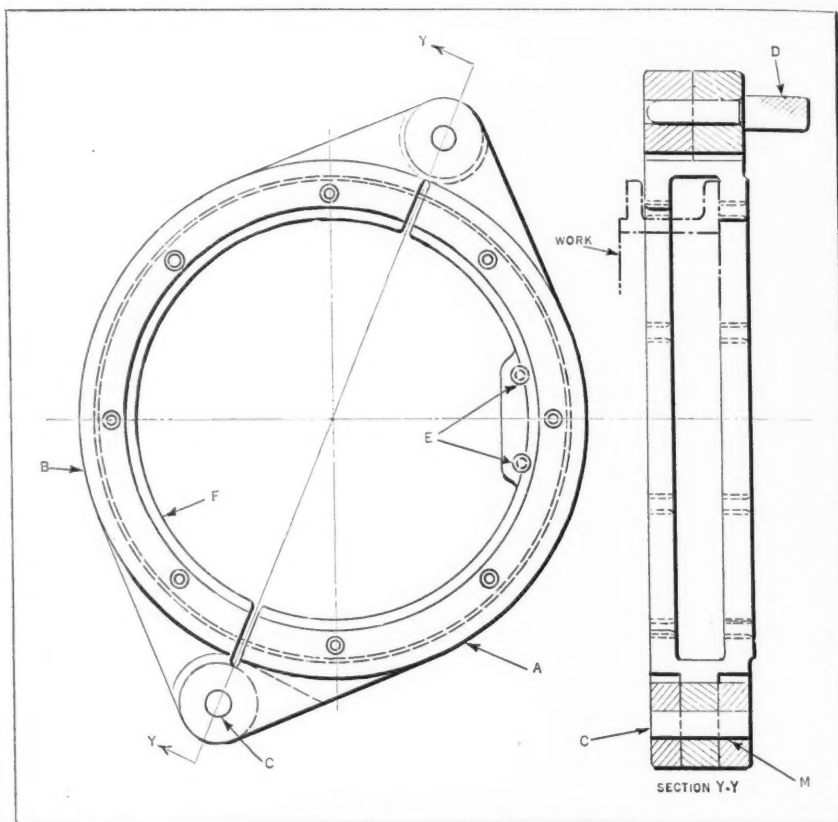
Jig for Drilling Casting shown in Fig. 1
